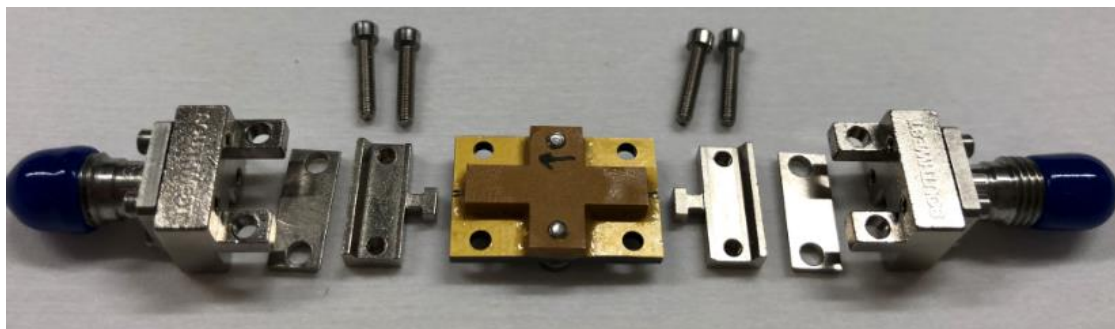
Exploded View of the Final Device Assembling by Edge-Mounting the Connectors
